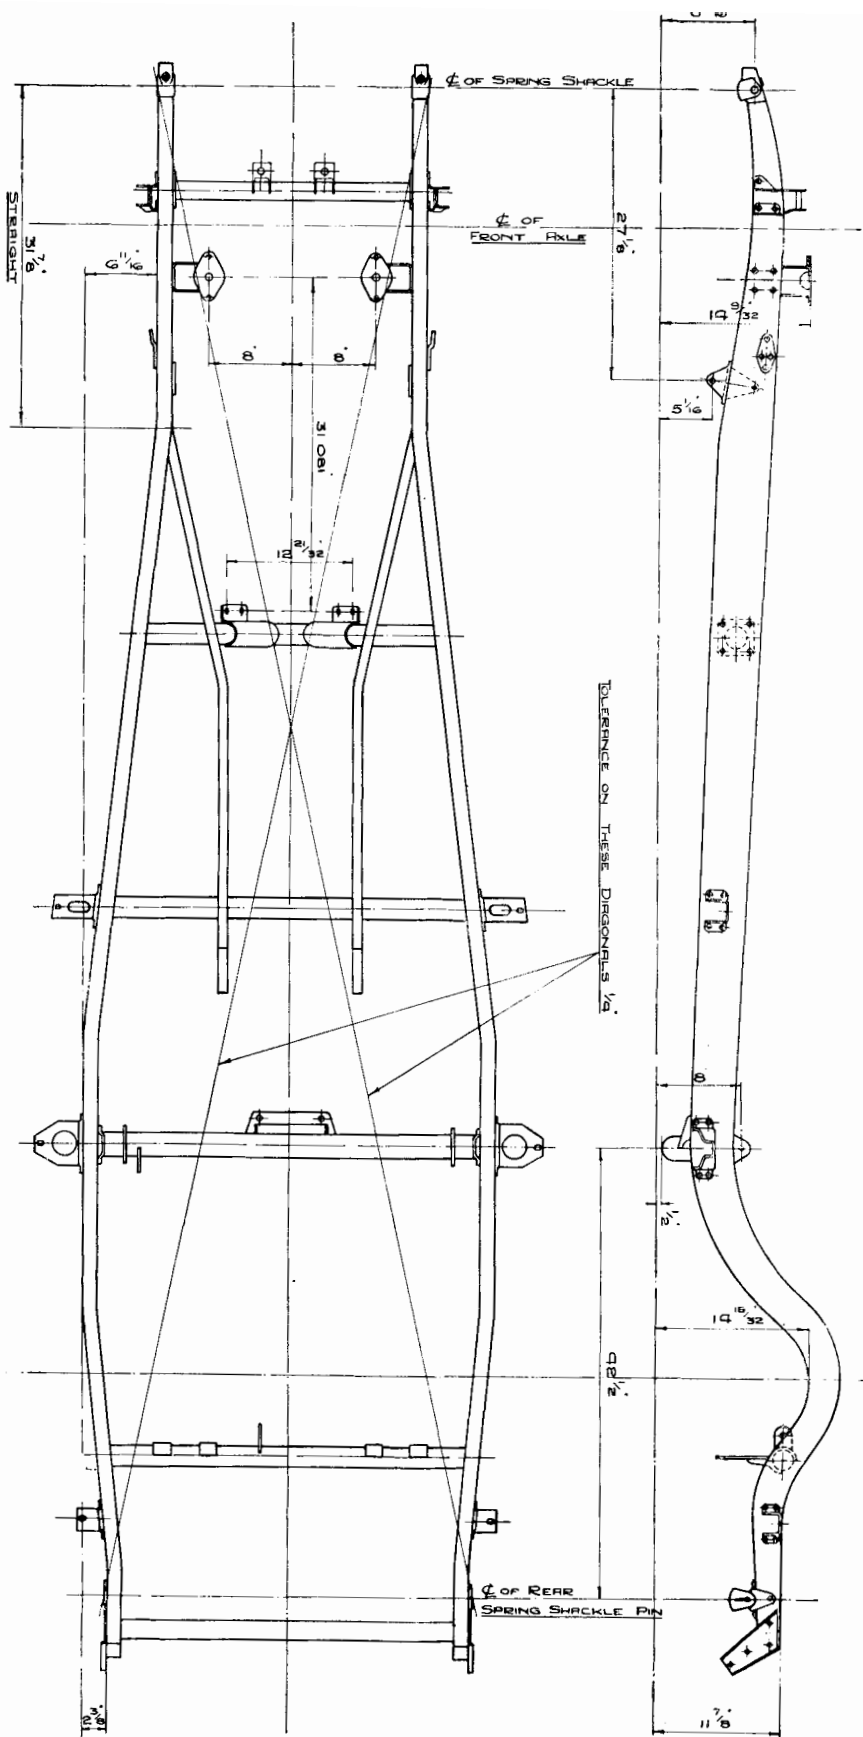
Illustration No. 2.—With the aid of this drawing the chassis frame can be checked for alignment. Should the frame need repair, due to accidental damage, it is advisable to return it to the Factory for repair.
